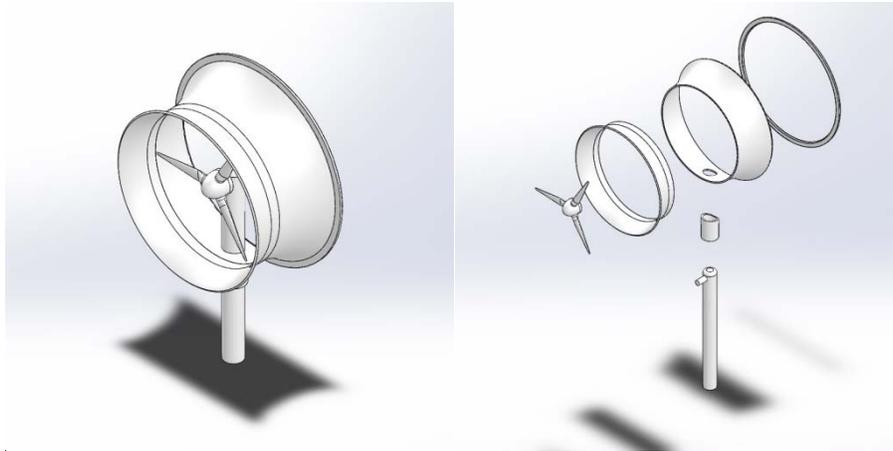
Sketch of assembled shroud (left) and exploded view of shroud system (right).
